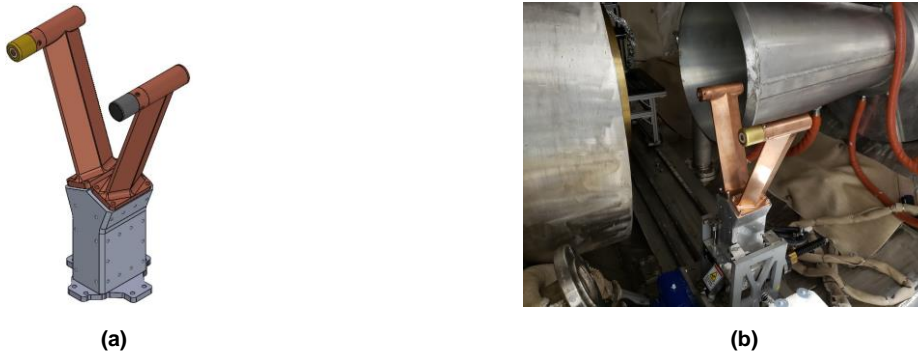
(a) CAD model of double arm and (b) installed double arm.
